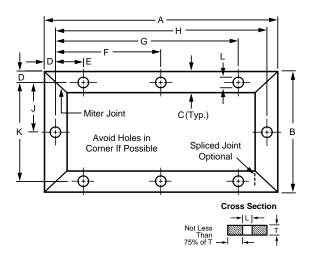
Dimensions and Tolerances for POLASTRIP and COMBOPOLASTRIP Fabricated Gaskets
